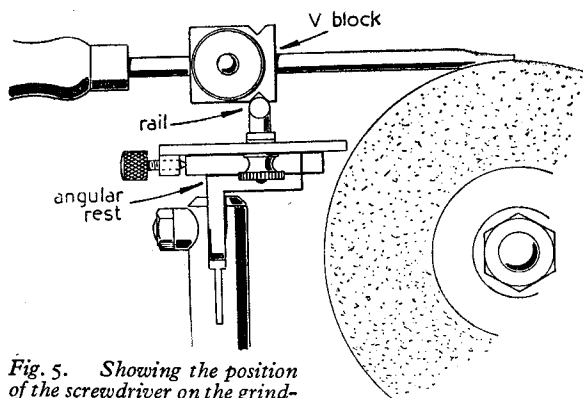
Showing the position of the screwdriver on the grinding wheel
